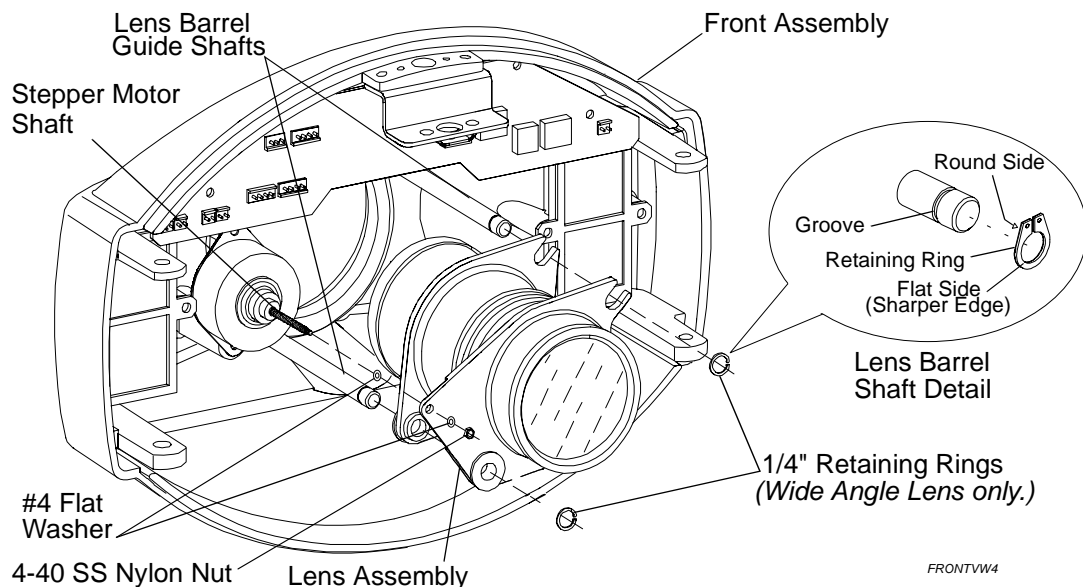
VL6 Luminaire Lens Assembly Replacement
